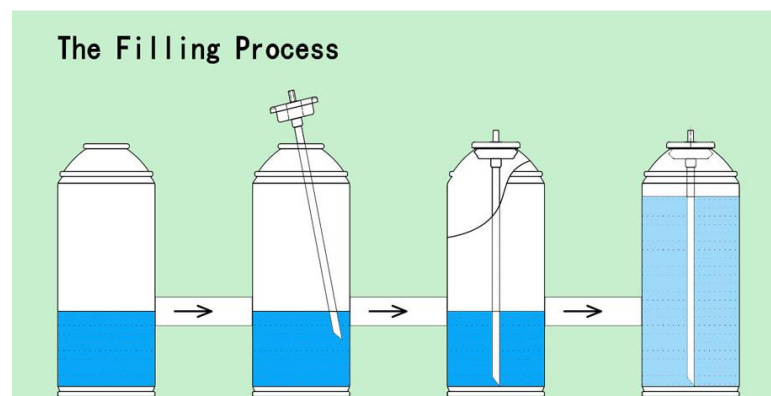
Filling process; Fill, Valve insert, Clinch, Gas fill^[2]
